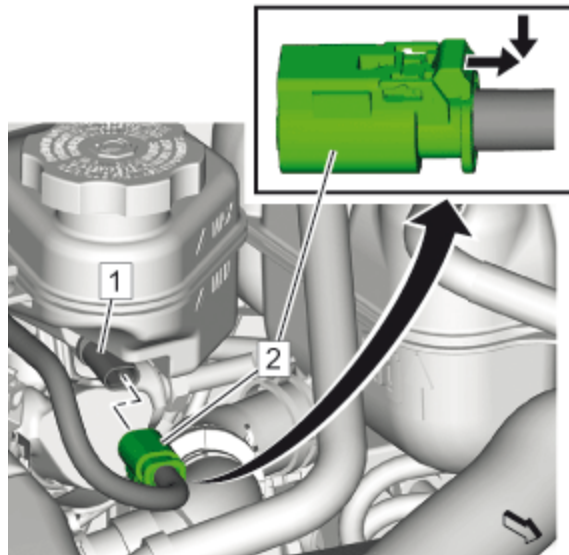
Electrical Connector And Brake Fluid Level Sensor
